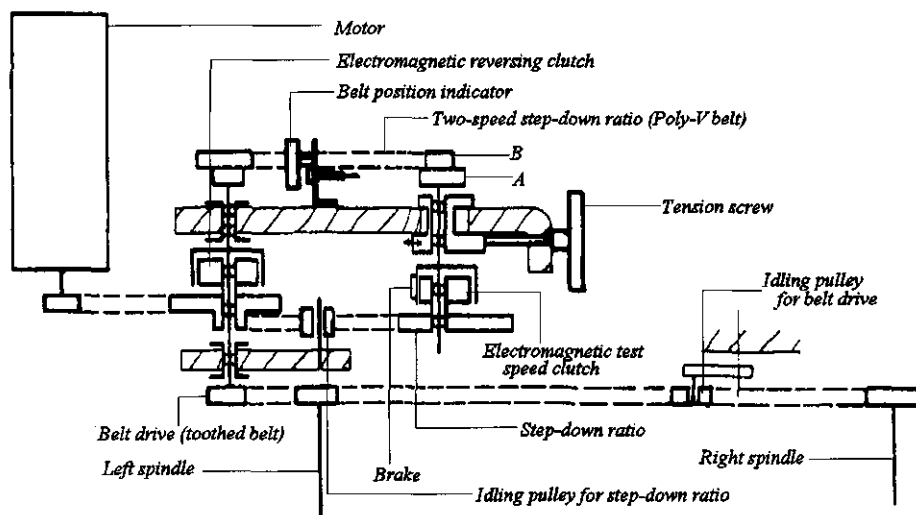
Zwick Universal Testing Machine: DC variable speed drive.
